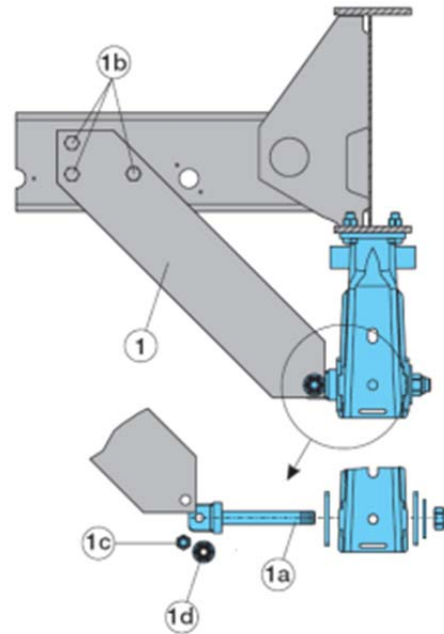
Struts in bolted steel air suspension hanger brackets. (Front view)
